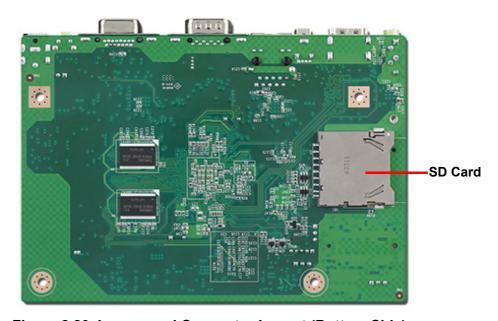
Jumper and Connector Layout (Bottom Side)
